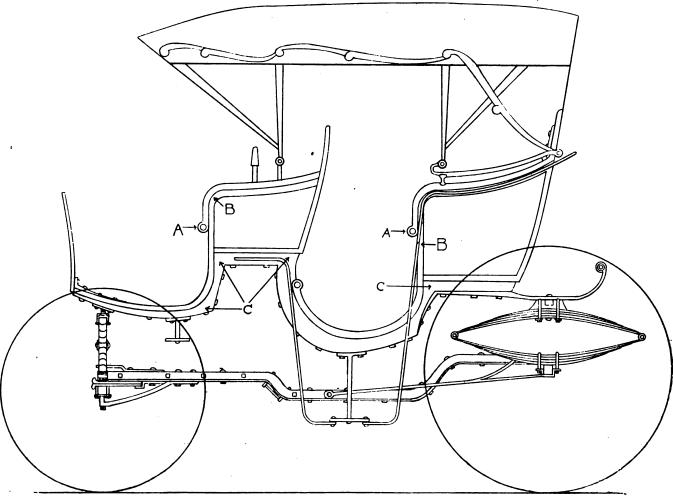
SHOWING SIDE ELEVATION OF CABRIOLET.
